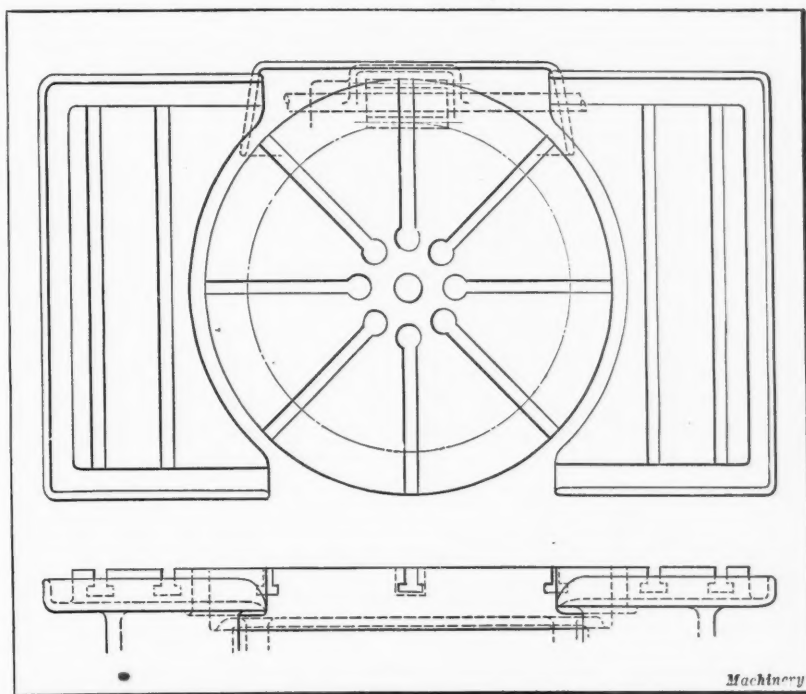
Sectional Design of Table consisting of a Rotary Circular Table flanked by Two Sections that enable Work to be mounted for Longitudinal Machining
